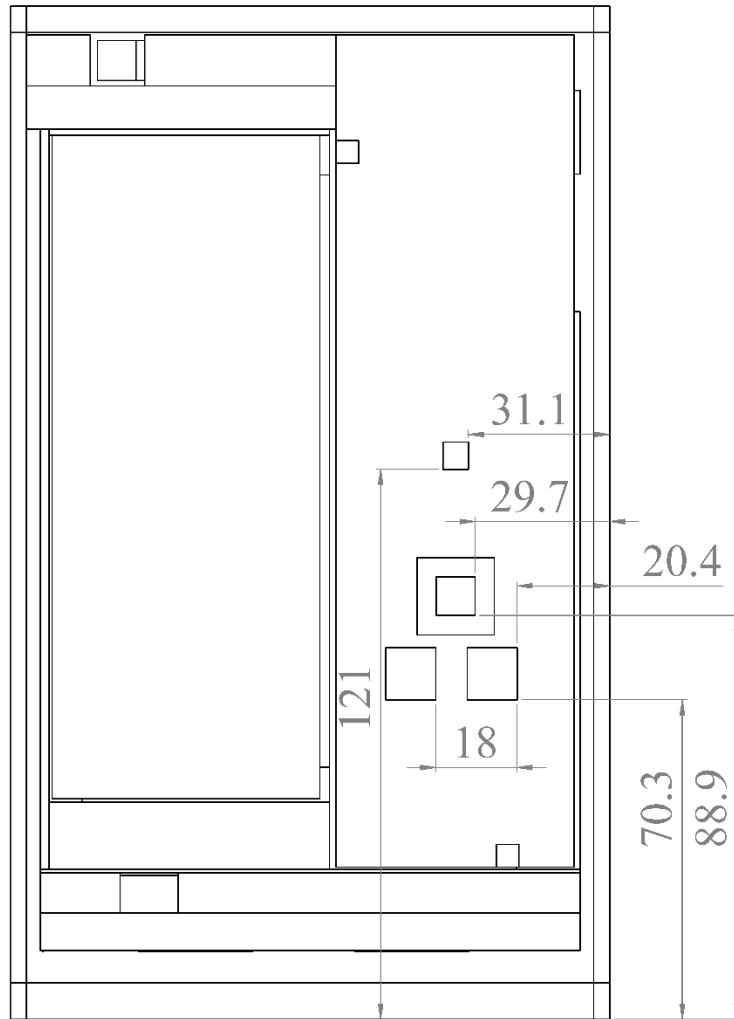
Dimensioned drawing of the tablet showing the location of the main sources on the PCB, dimensions given in mm
